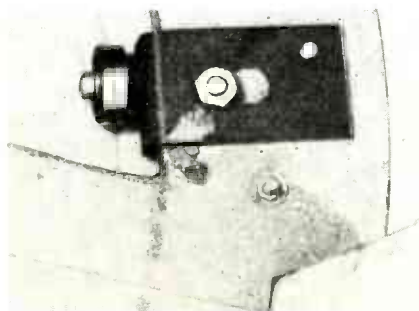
BALL-BEARING WHEELS mounted on bottom bulkhead support body as it rotates.
